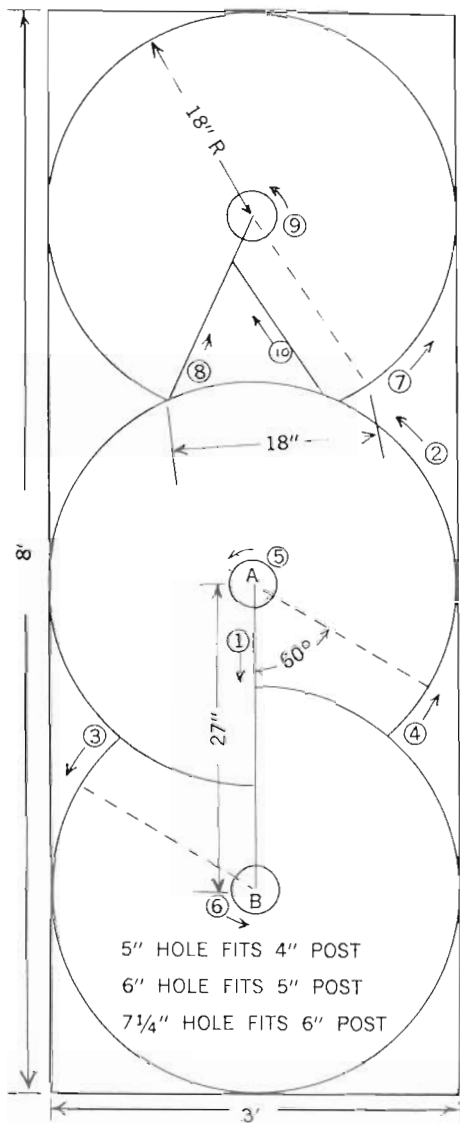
Cutting pattern for making conical predator guards from sheet metal. Numbered arrows indicate cutting sequence and direction. See Figure 6 for assembly and mounting details.
